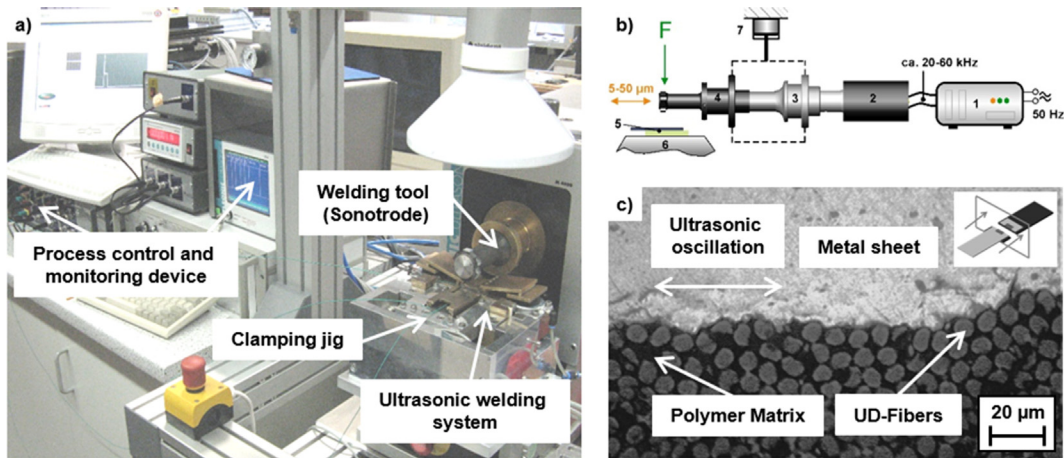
a) Experimental equipment for ultrasonic metal welding of metal/FRP; b) Main components of the welding system: Ultrasonic generator (1), piezoelectric converter (2), Booster (3), Sonotrode (4), Joining partner (5), Clamping jig (6), Load transmission (7); c) Characteristic interface area of an ultrasonically welded Metal/FRP-joint (metal welding variant).
